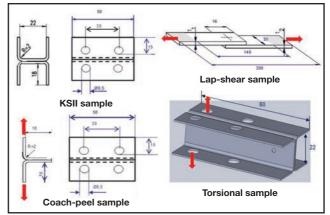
Small sample types used to develop spot weld failure parameters.
